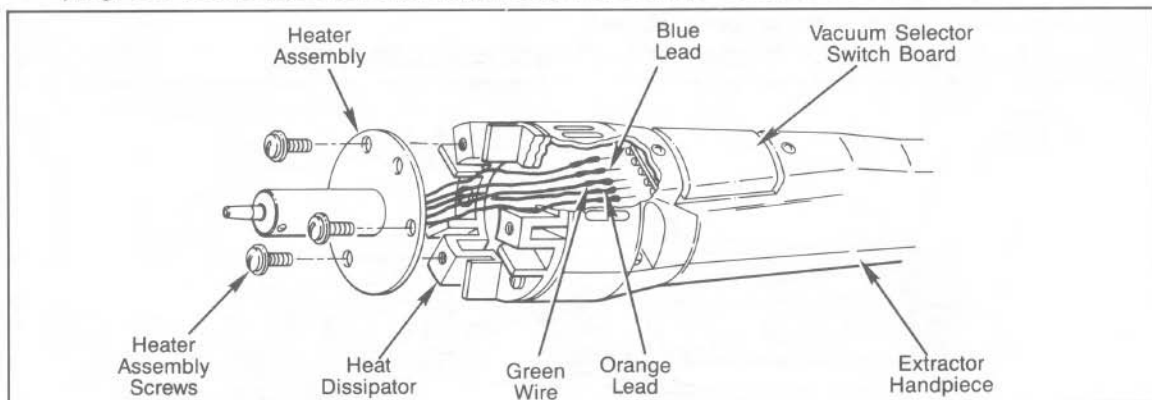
EXTRACTOR HANDPIECE HEATER ASSEMBLY REPLACEMENT
